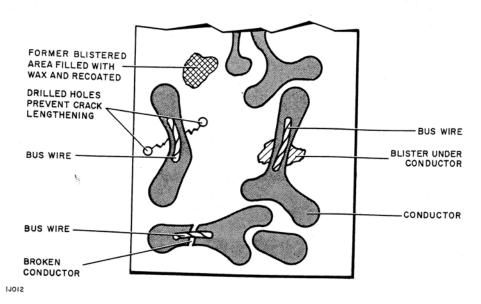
Repair of Surface Damage to Board and Printed Wiring
